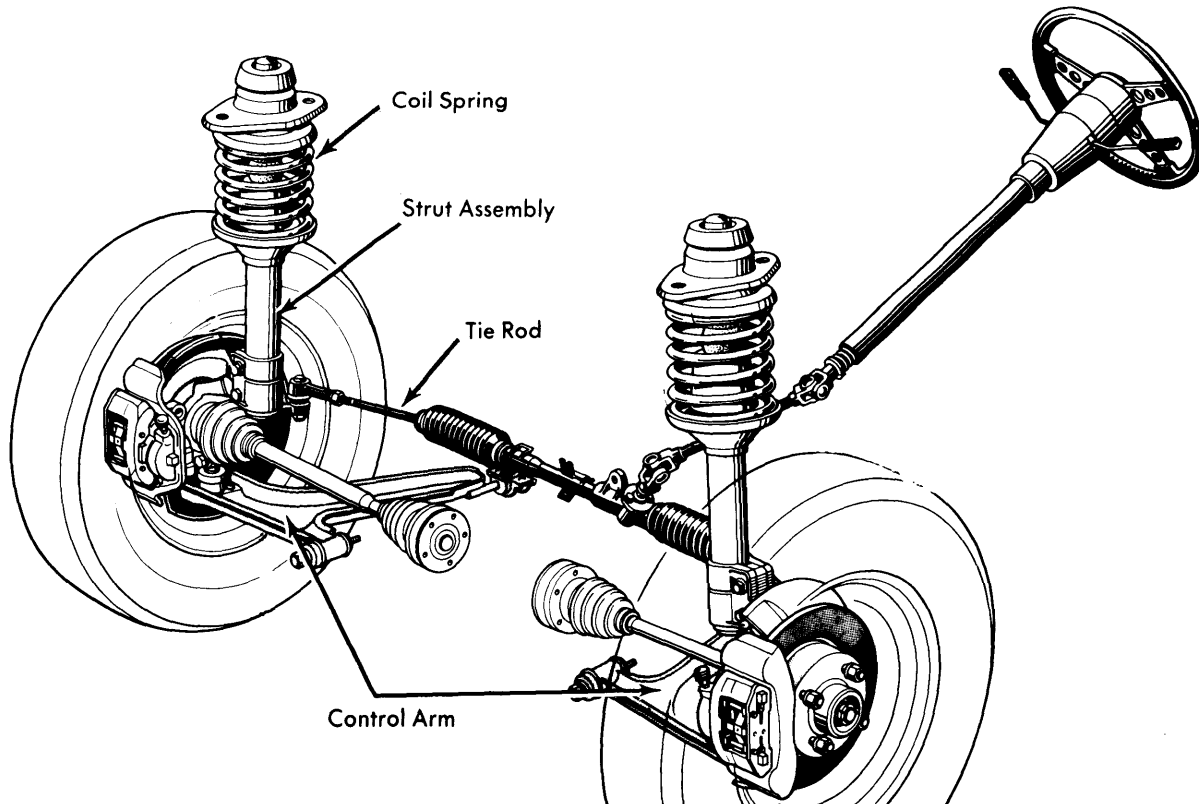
Rabbit & Scirocco Front Suspension Assembly
